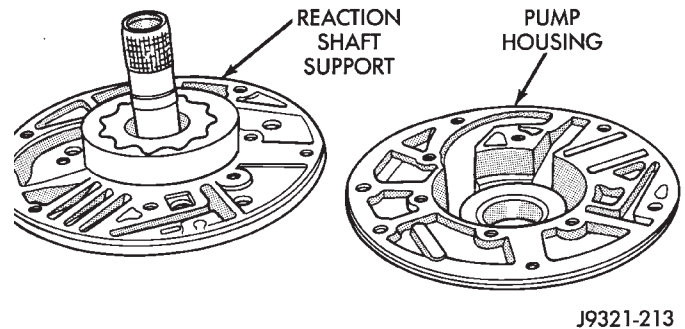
Separating Pump Housing From Reaction Shaft Support
